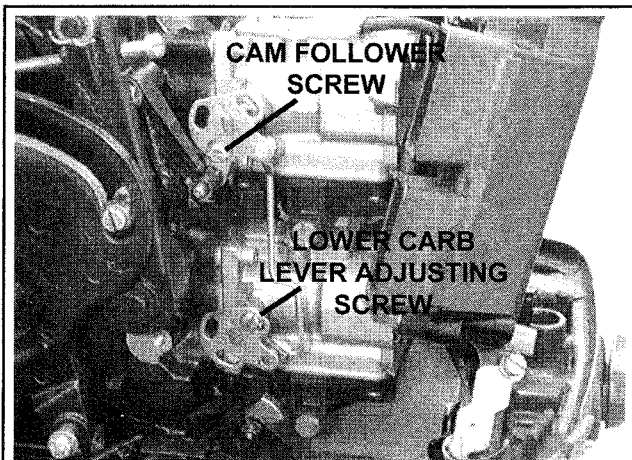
Both the throttle cam follower and lower carburetor lever adjusting screws must be loosened for throttle valve synchronization
